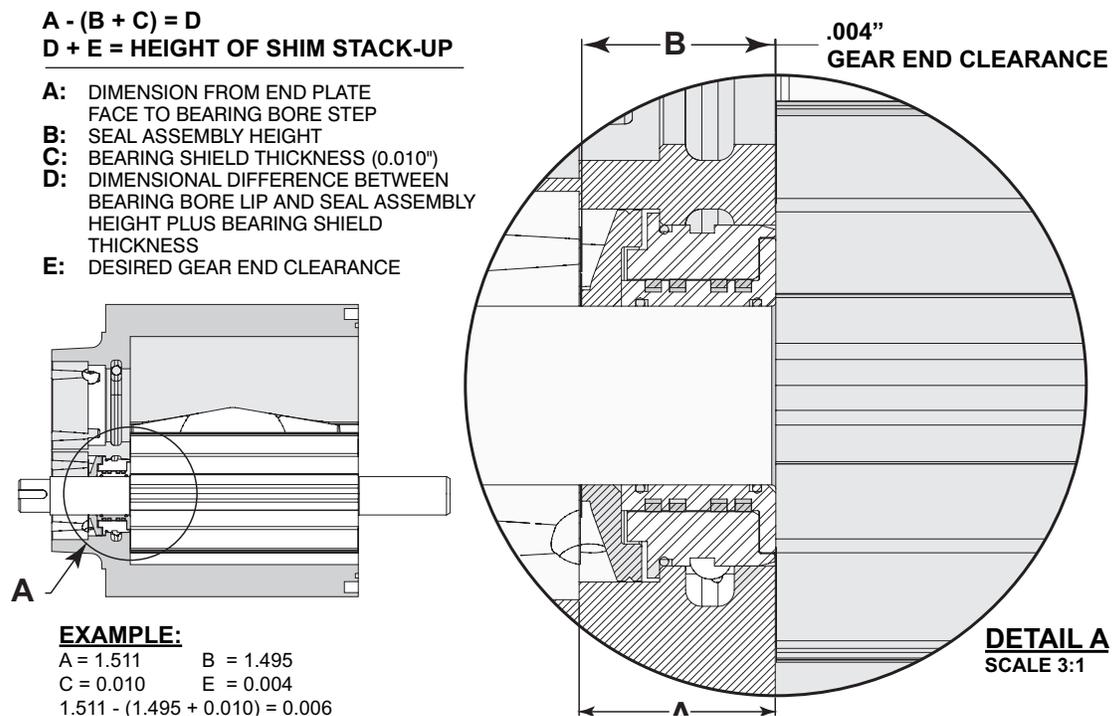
Bearing Bore Stack-Up and Seal Measurement
